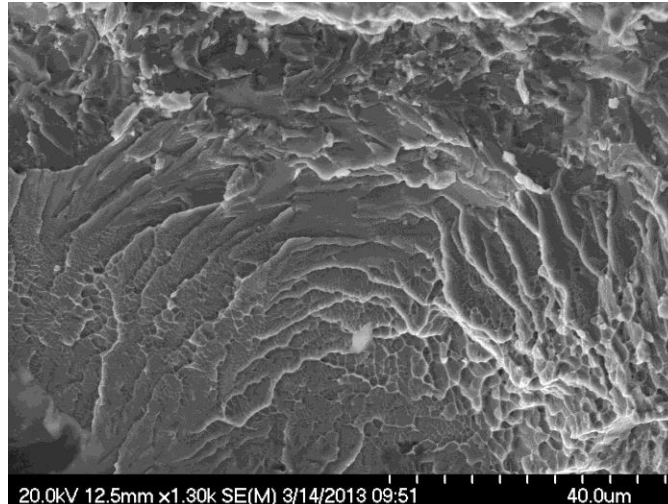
Fracture surface of a sample that broke at 393 MPa, which was the highest strength achieved. The original cup and cone geometry was intact after fracture. Quasi-cleavage is apparent, indicating a better joint than Figure 17.
